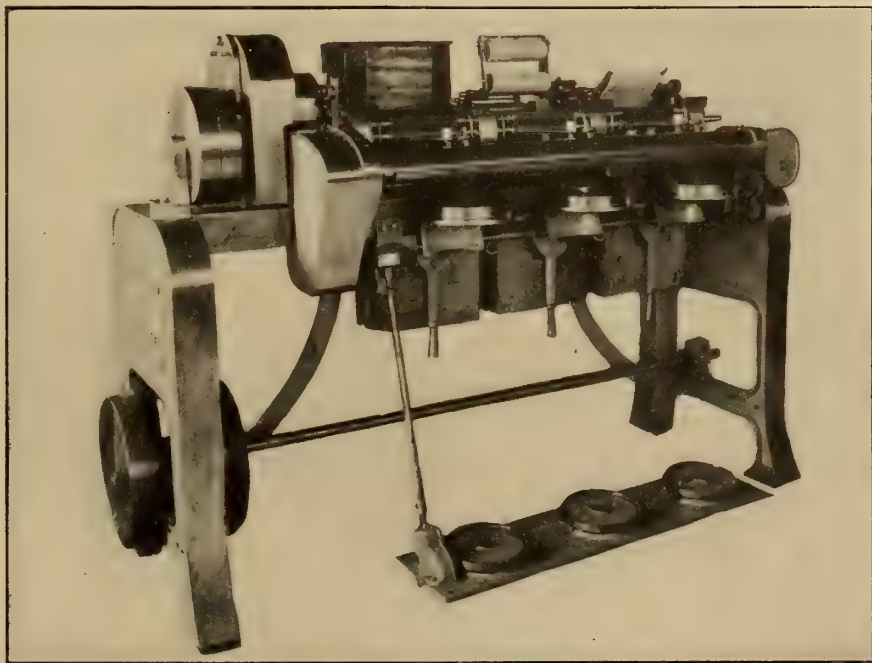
DRAWING FRAMES (THREE DELIVERIES), SHOWING ROLLER WEIGHTING, TOP CLEARERS RAISED AND DELIVERY CANS REMOVED. DOBSON & BARLOW, LTD.
